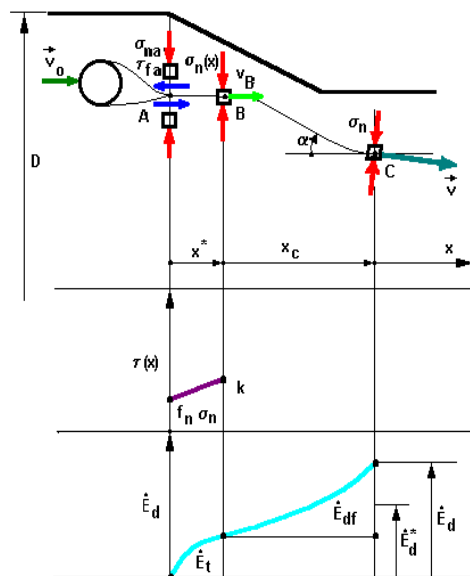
Longitudinal welding in direct hot extrusion
